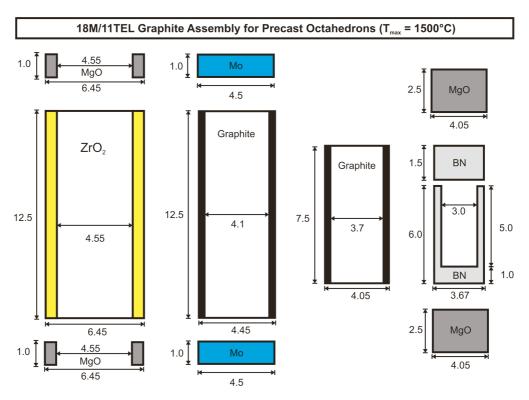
Dimensions/mm of the pieces used for an 18/11 assembly (precast MgO-octahedron, pyrophyllite gaskets).
